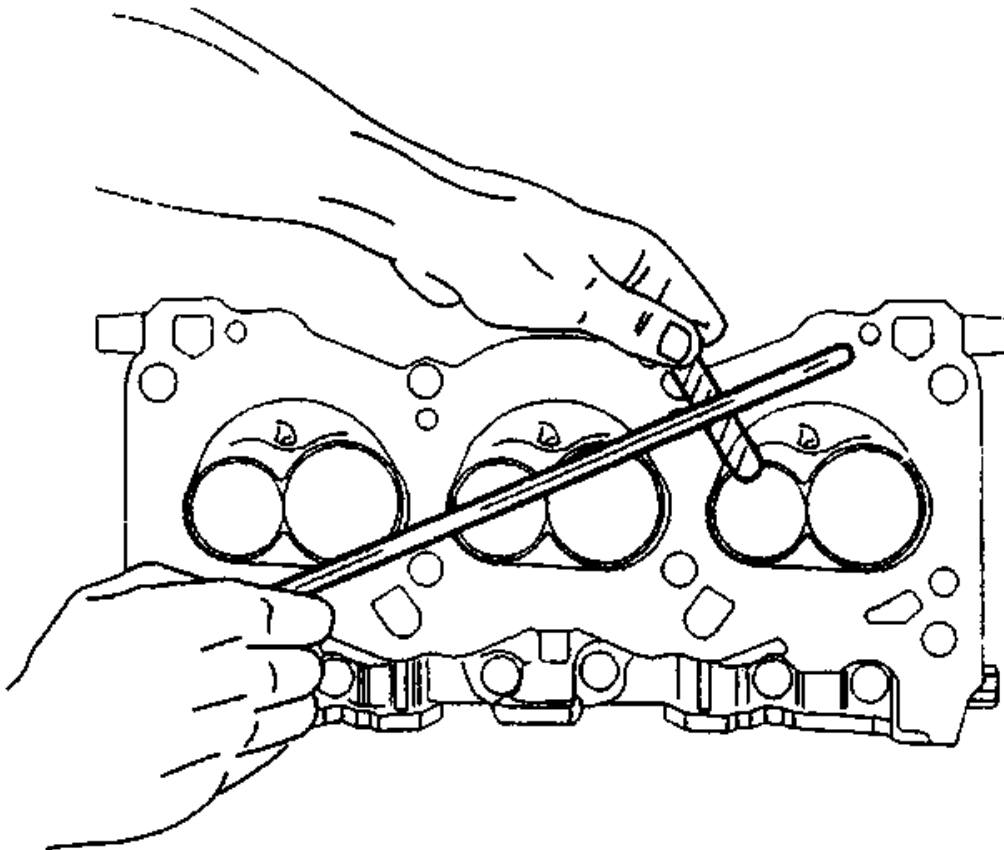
Inspecting Cylinder Head Mating Surfaces For Flatness
